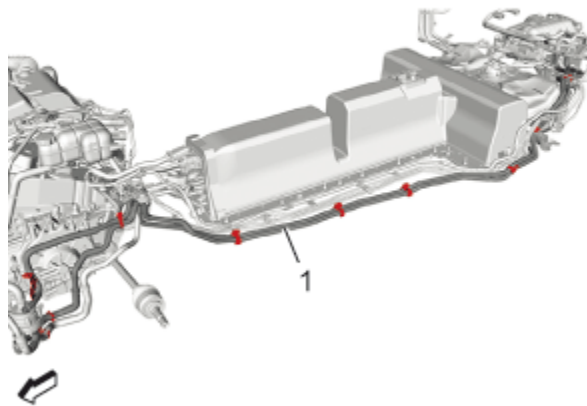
Drive Motor Generator Control Module Cooling Outlet Hose
